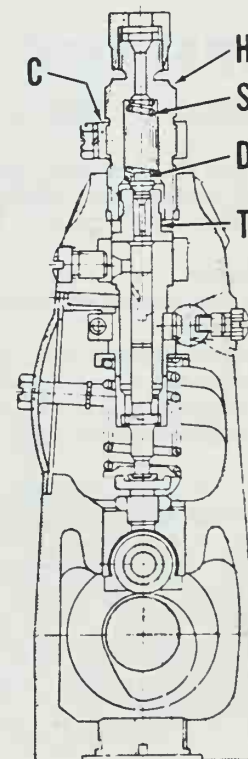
Cross-sectional view of Bosch PES fuel injection pump.
